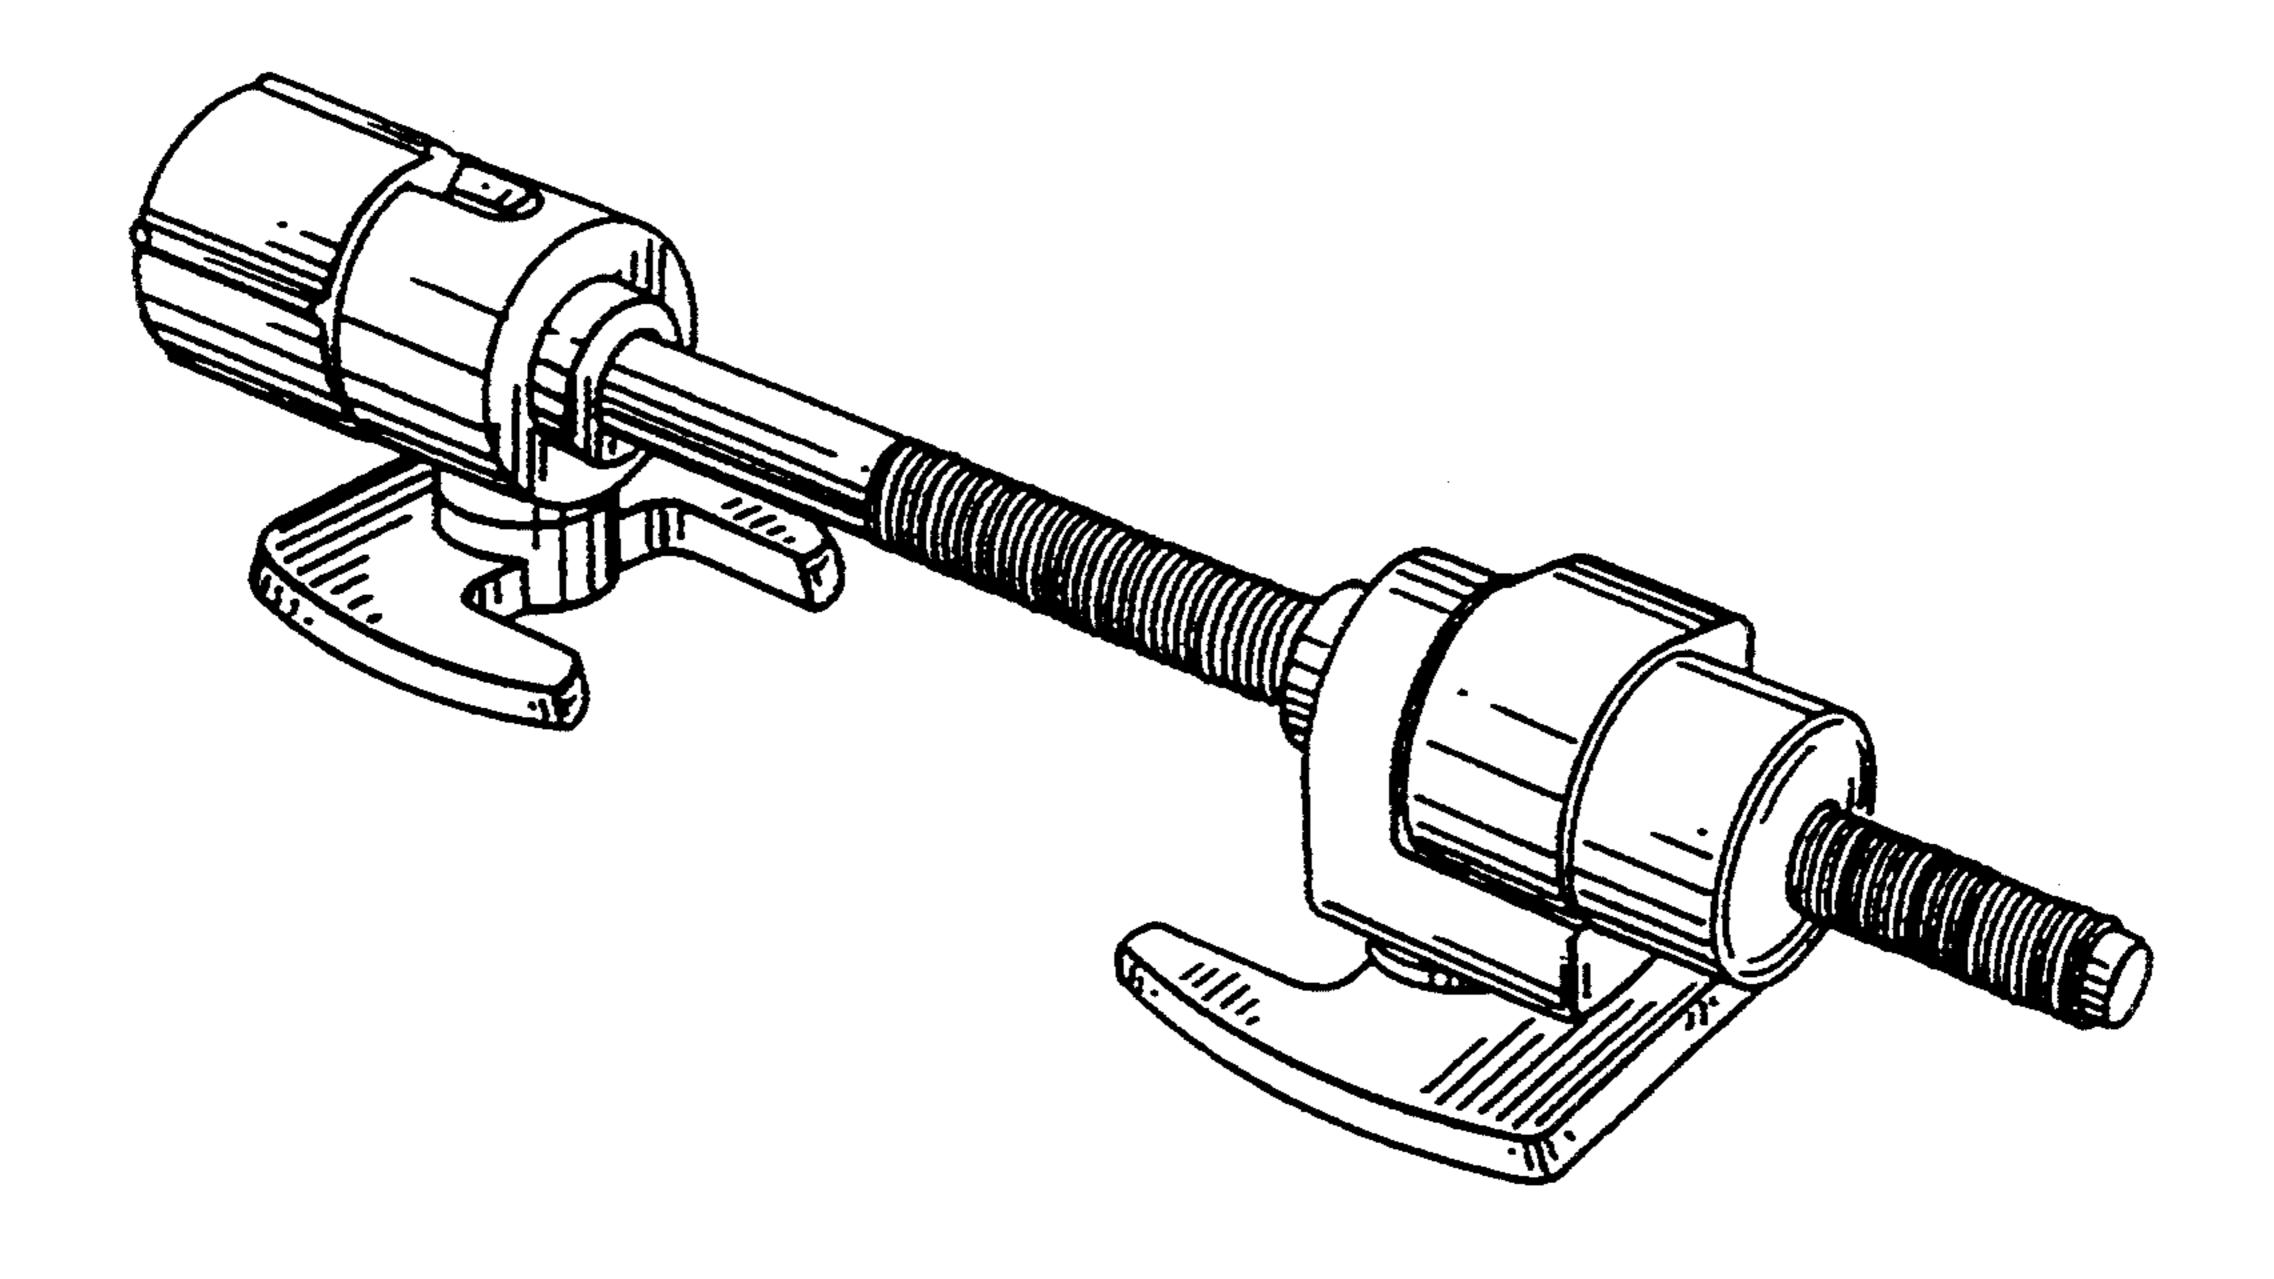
is a front perspective view of the surgical contractor for the closure of skin defects design, from the side opposing FIG. 2;
